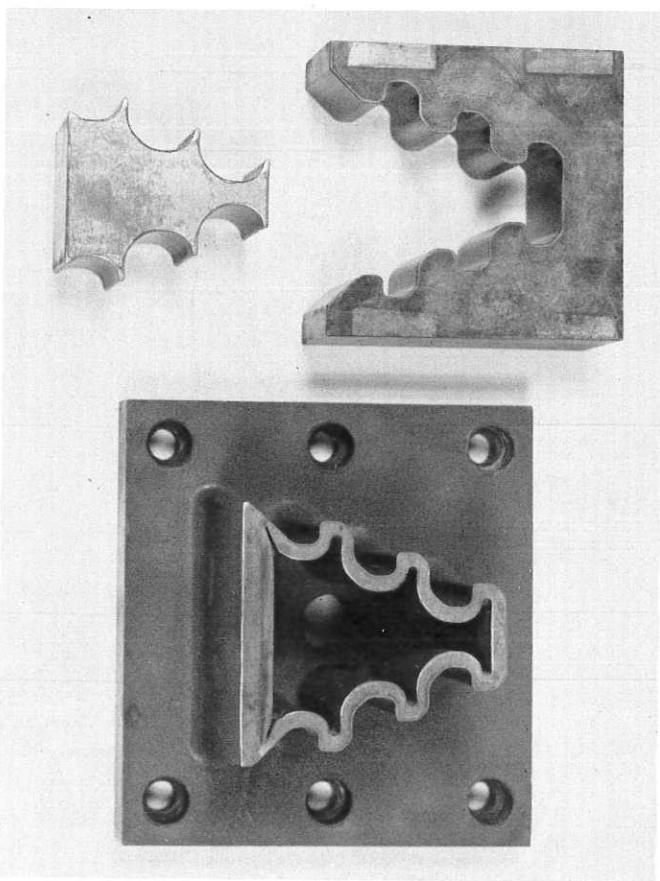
A generating tool can be used to cut almost any shape from plate material. The tool is a simple envelope of the shape to be machined. (Courtesy of the Cincinnati Milacron Company.)
